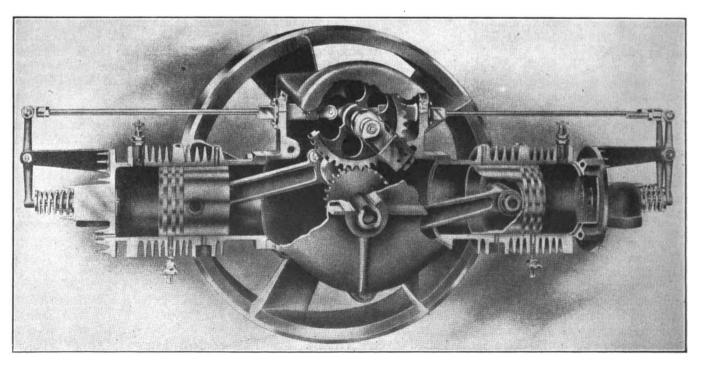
THE BLACK MOTOR AND PARTS, SHOWING PARTS OF INTERIOR MECHANISM
